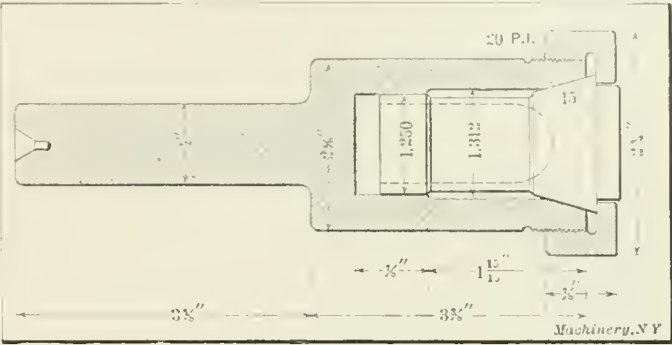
Holder for Grinding No. 1 Brown & Sharpe Screw Machine Collets
